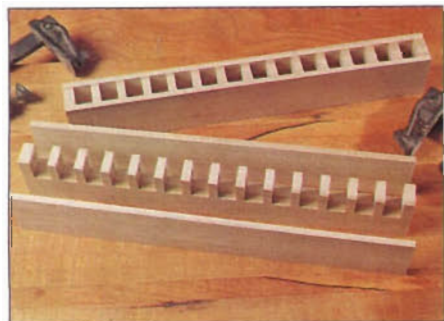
Photo B: Adding faces to the dadoed rails forms precise, uniformly spaced pockets for the slats to fit into. Gluing and clamping parts carefully will ensure invisible joints.
